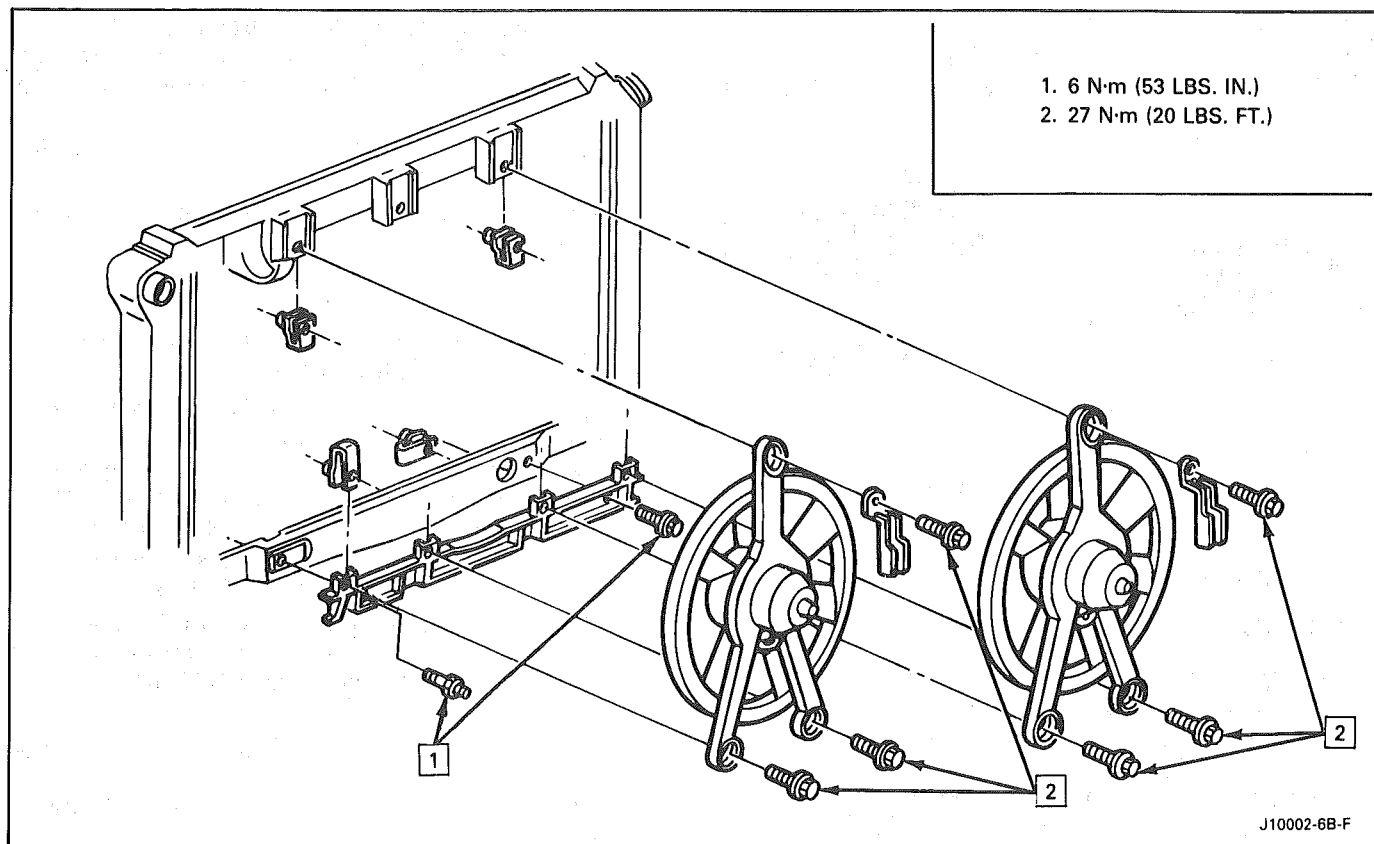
Fan Mounting — V.I.N. F and 8 (with A/C)
